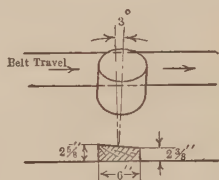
Guiding a Belt by Tilting the Idler Stands and Pulleys.
